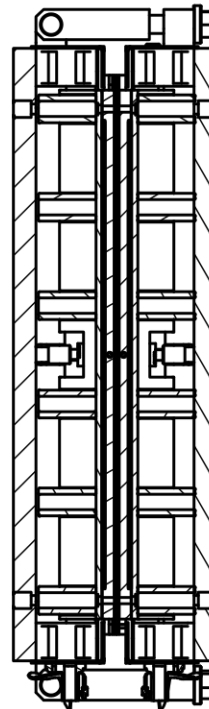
H08D016653 Welding plate PML-200
